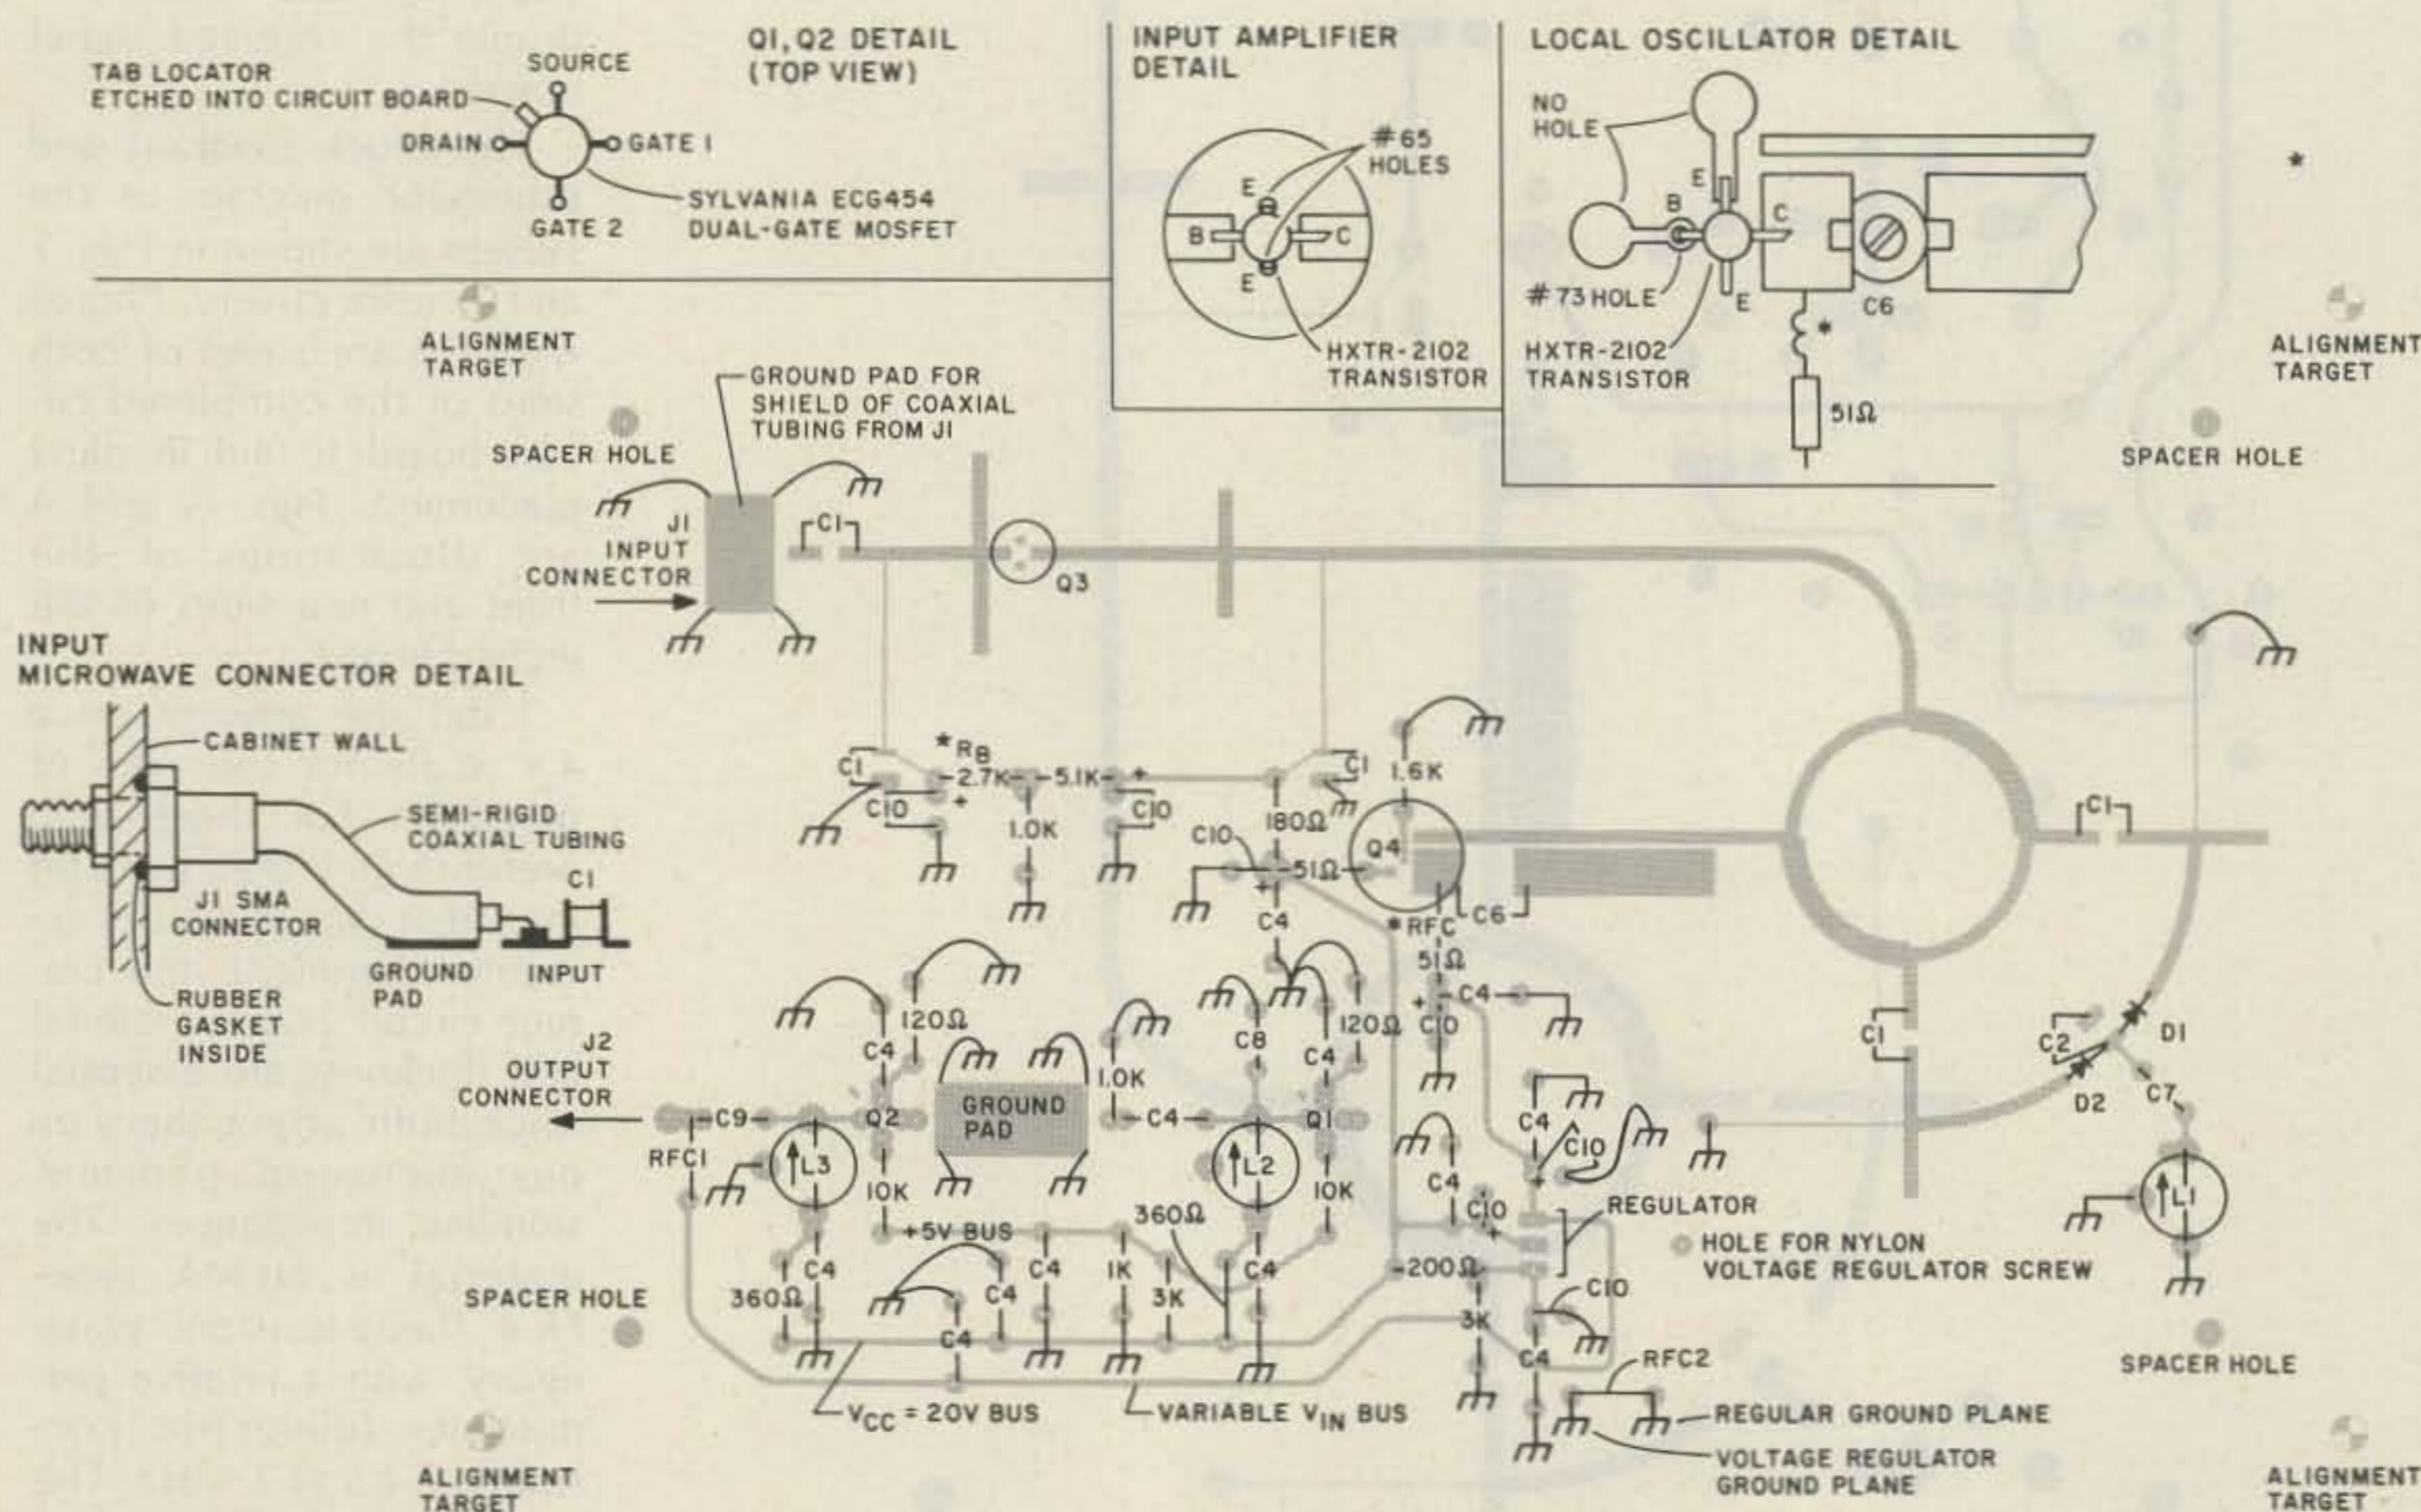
Parts placement, component side. Hole sizes: #69 drill bit except as otherwise noted: regulator (3 holes): #62; L1, L2, L3 (9 holes): #51; regulator and spacers (5 holes): #27; emitter leads of Q3 (2 holes): #65—locate centers with #80; base of Q4, 8 ground-pad corners, ground side of C2, and 4 ends of thin bias feed stubs (14 holes): #73. C1≥47-pF chip; C2=18-pF chip; C4=0.01-uF ceramic; C7=24-pF mica; C8, C9=18-pF mica. ★R_B is adjusted as explained in text. 2.7k is the initial value to start from. * 2-turn microwave rfc as explained in text.
